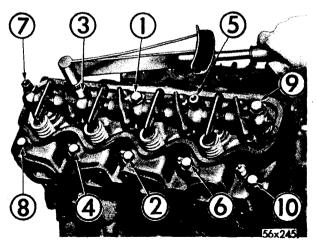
Tightening Cylinder Head Bolts Single Rocker Shafts
